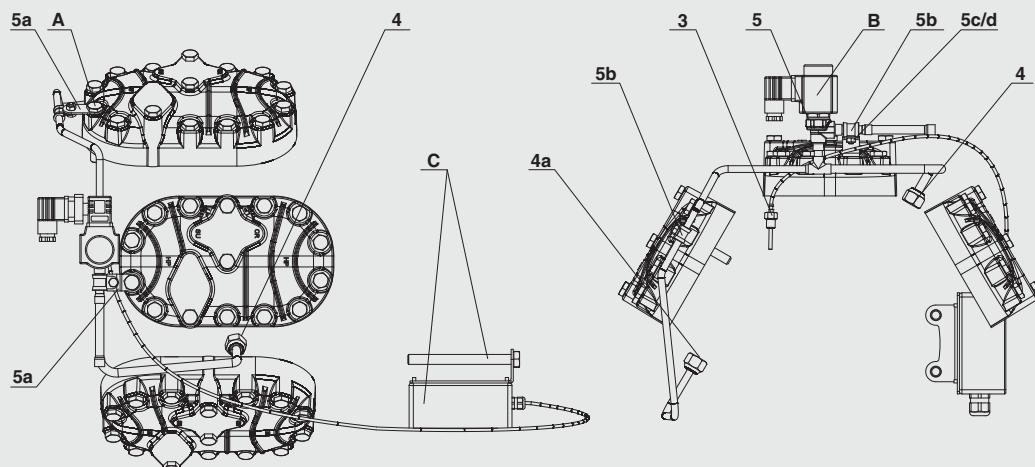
Mounting position of the injection valve: 4VE(S)-7(Y) .. 4FE-28(Y)
